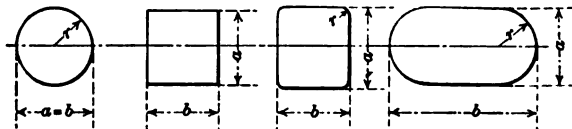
Core shapes and dimensions for electromagnet windings.
